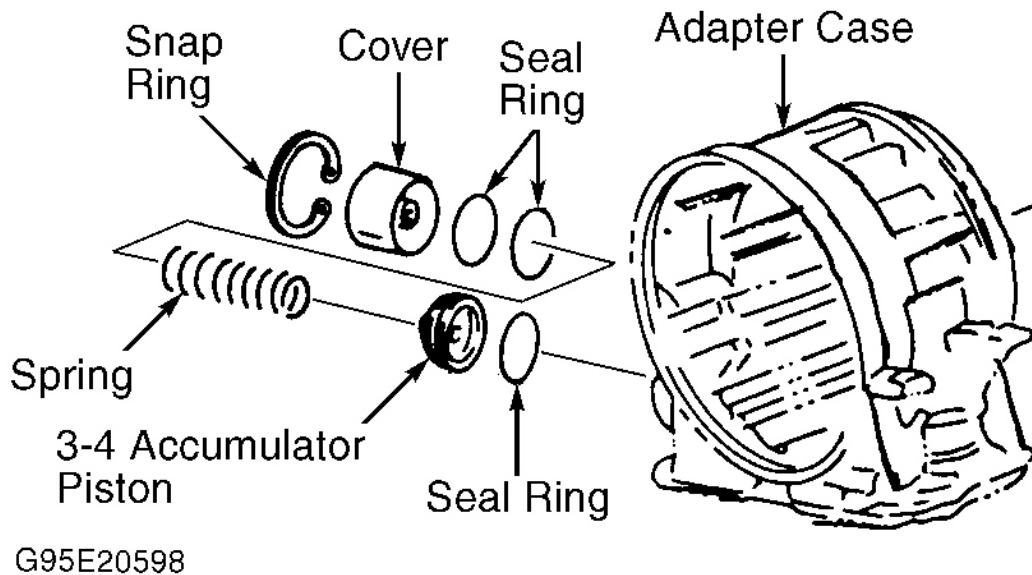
Exploded View Of 3-4 Accumulator Piston
